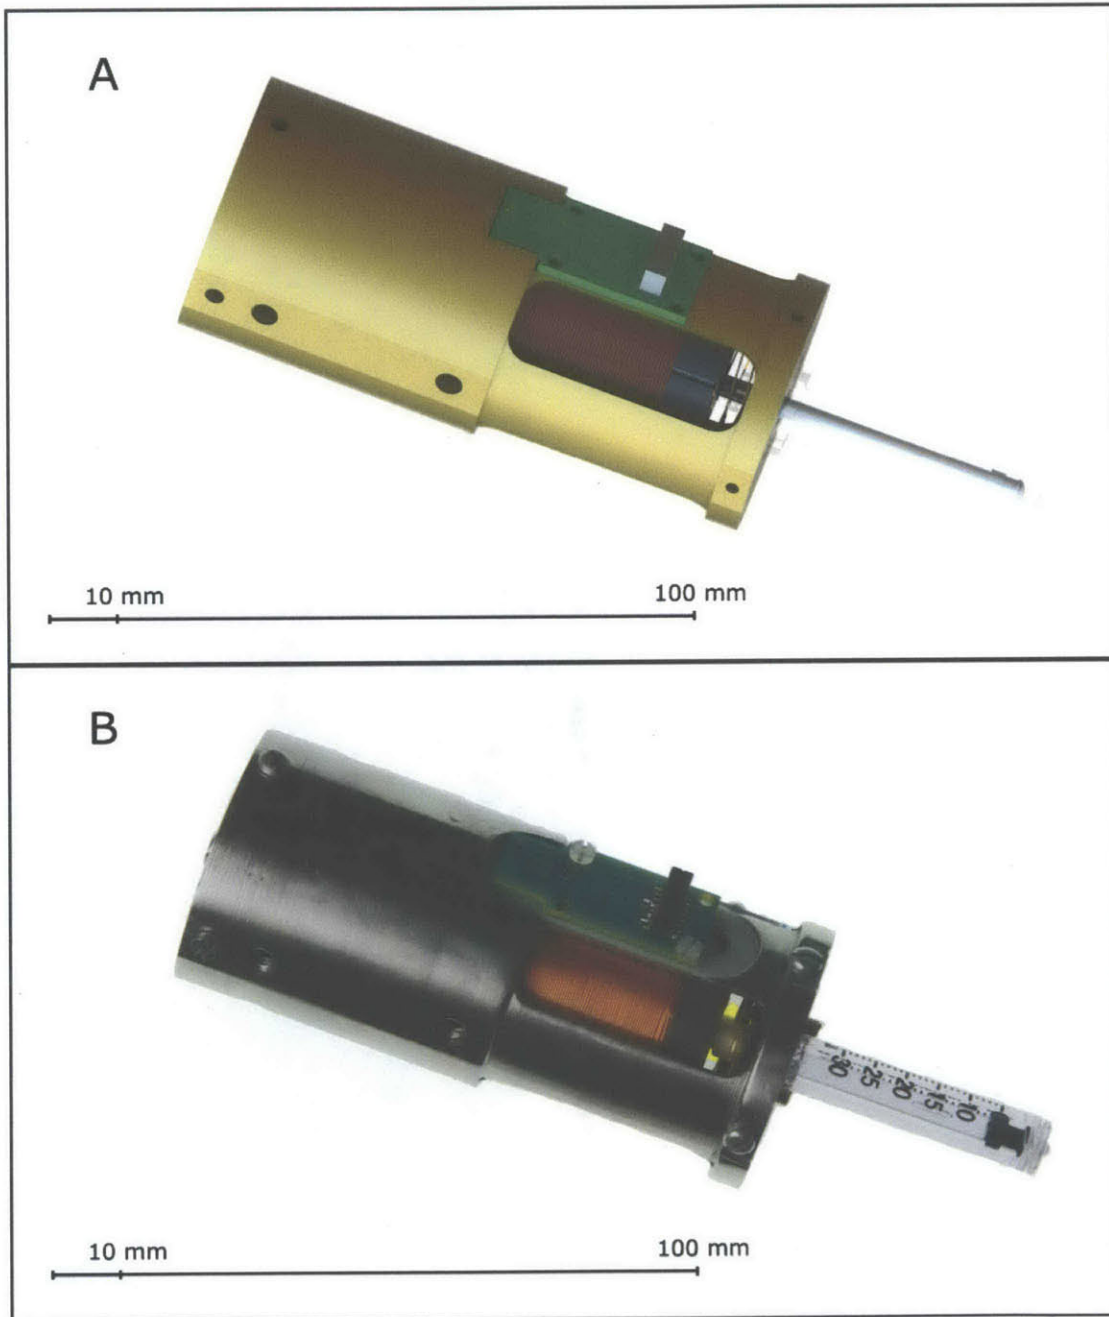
Perspective view of the (A) modified jet injector CAD and (B) manufactured and assembled jet injector. Gold plating was not included
